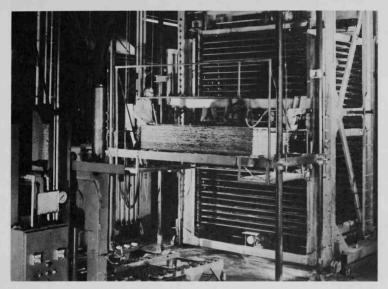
After the veneers are laid up, they are placed between platens (steel plates) of a giant press. Pressure and heat are then applied and the veneers are bonded together, forming plywood panels. (American Plywood Assoc.)
